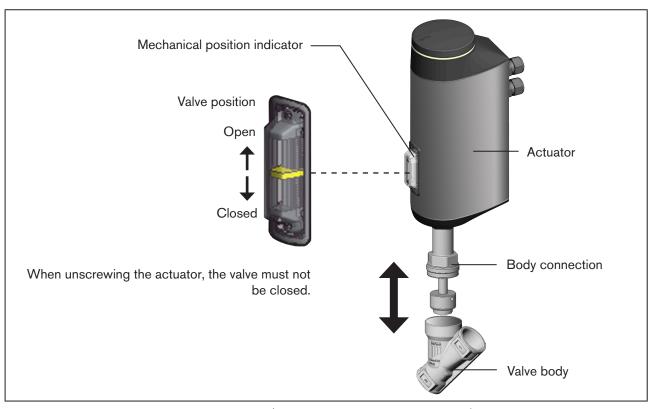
Installation of electromotive actuator (angle seat valve shown in the example)
